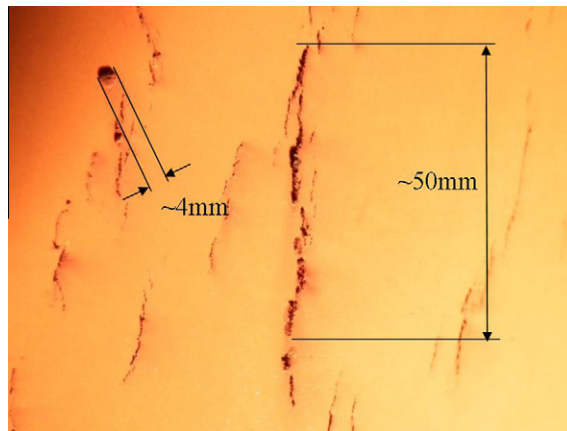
Examples of corrosive attack of the cylindrical part of the tank.
